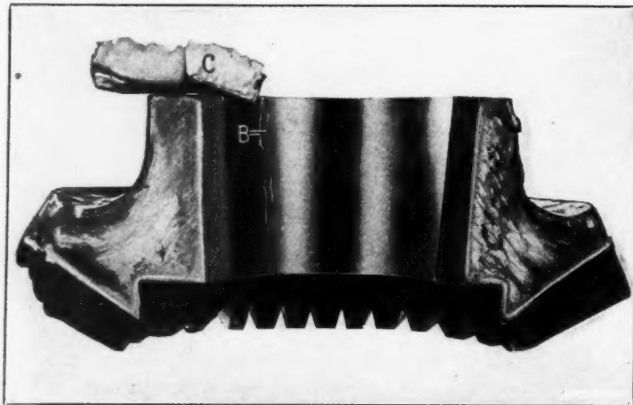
An Automobile Drive Pinion broken to show Structure of Steel after Heat-treating
